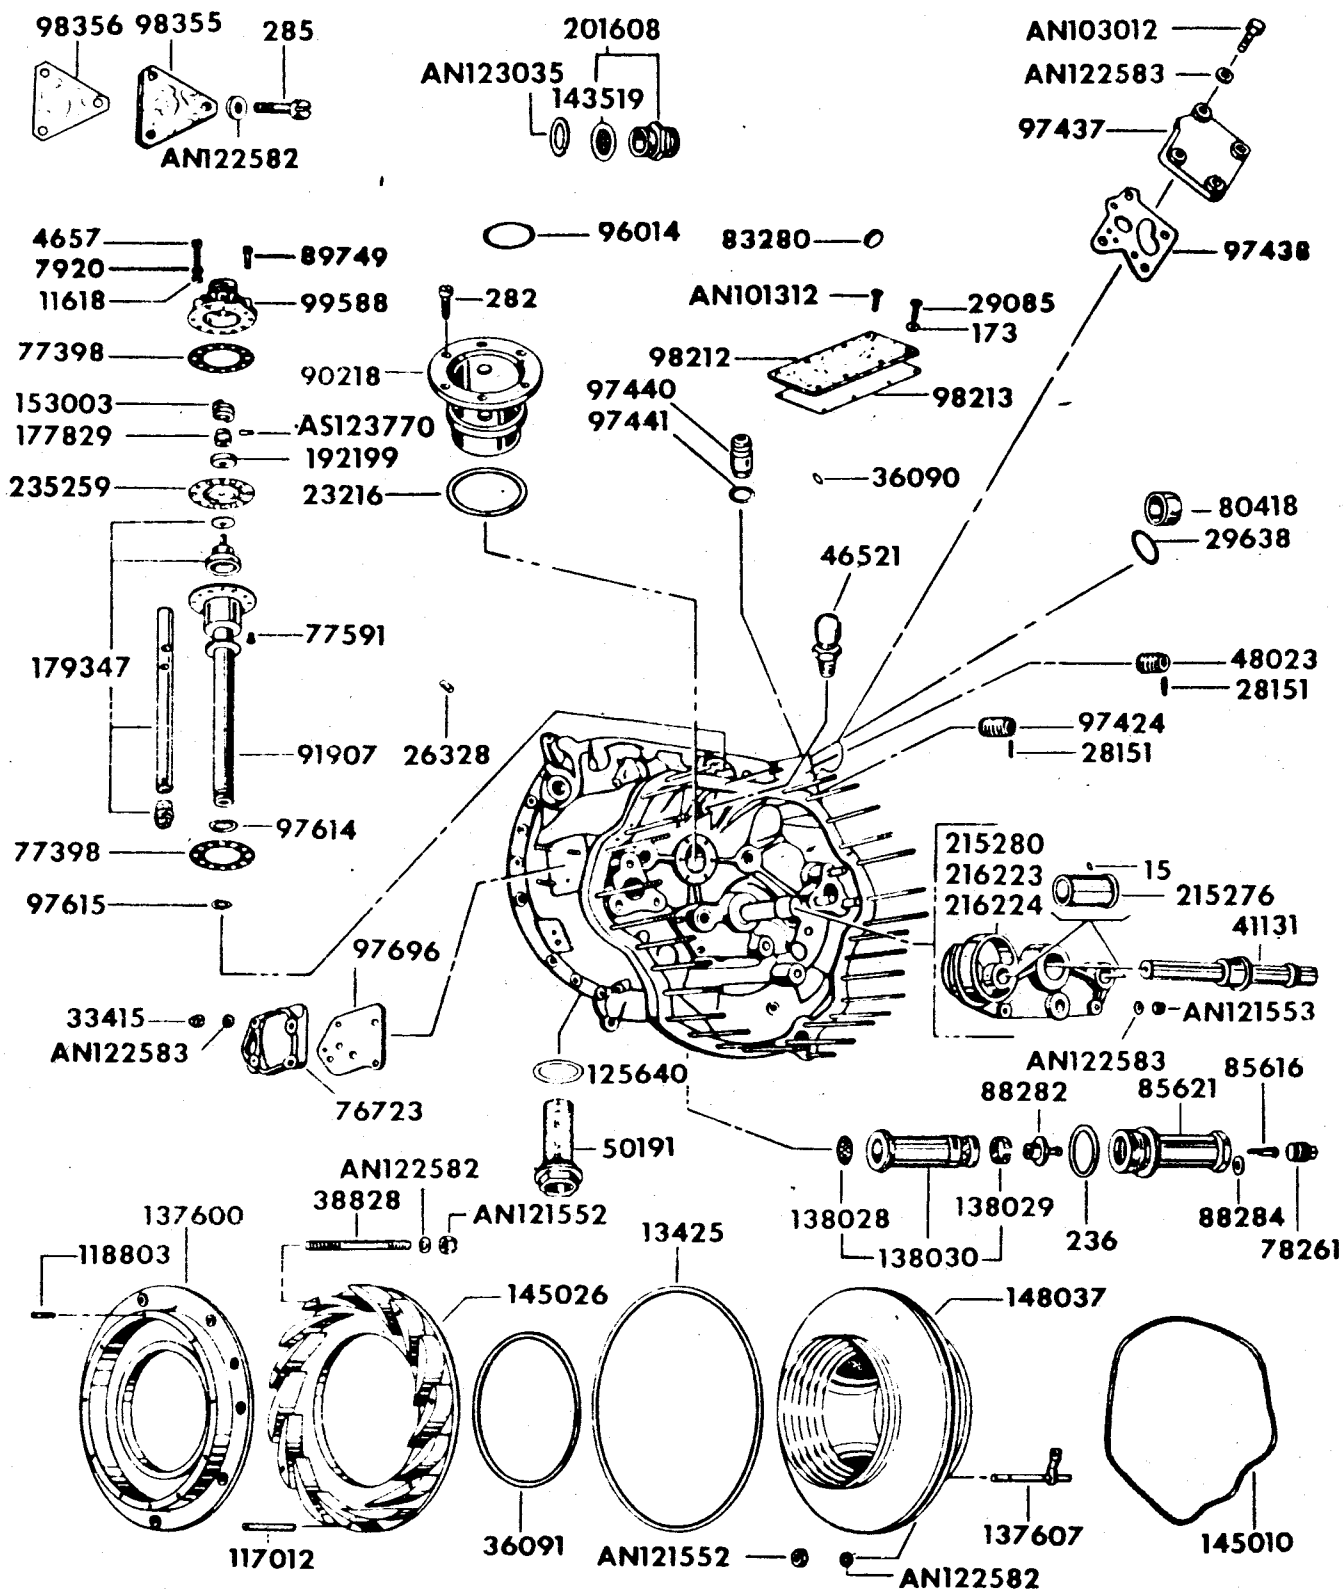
Diffuser, Fuel Feed Valve, Fuel Drain Valve and Breather
